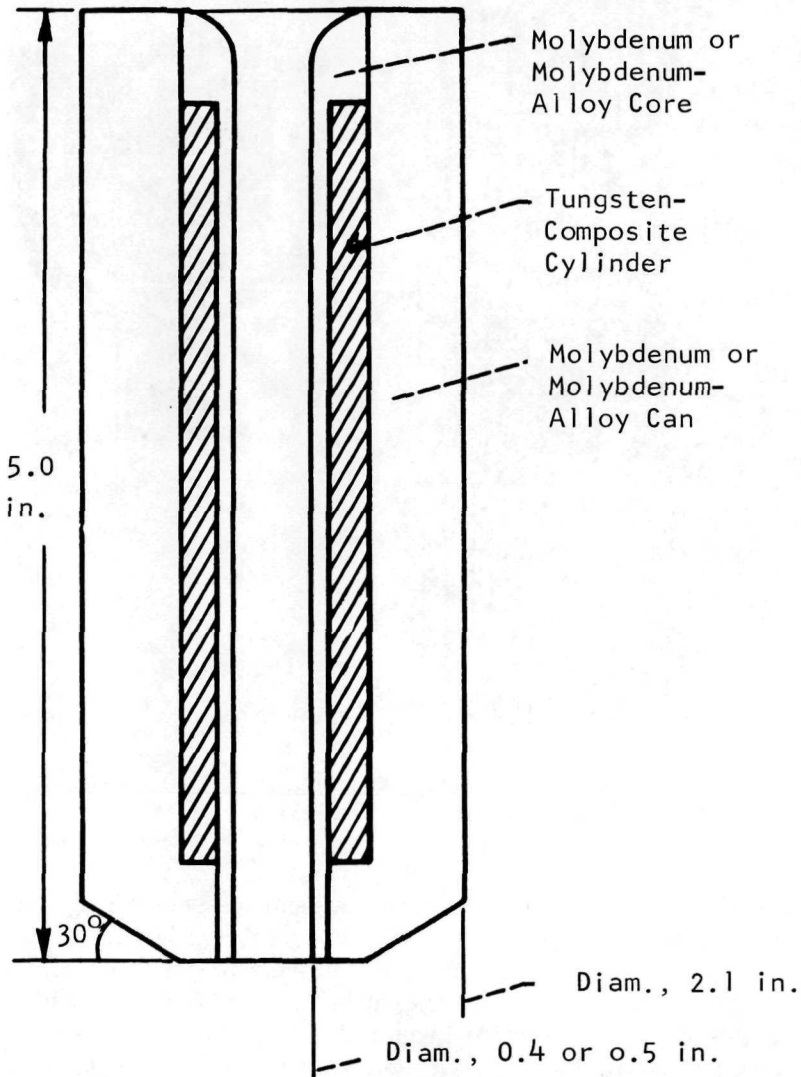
Billet assembly for extrusion of tungsten-composite tubing (ref. 160).
